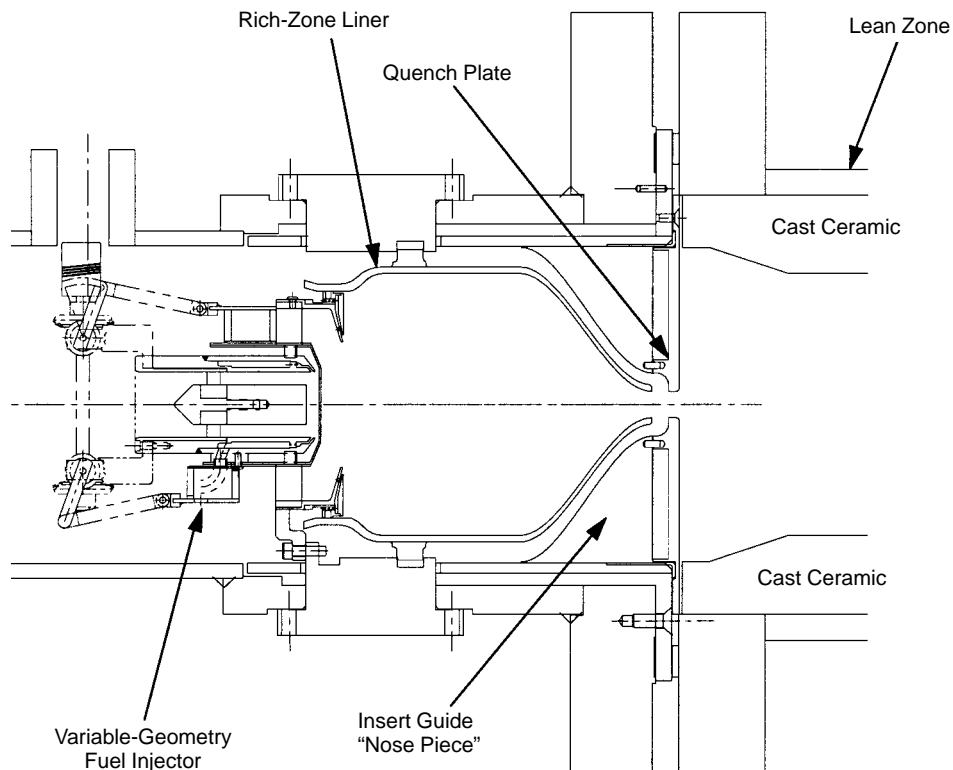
Integrated Module Rig Layout with RSQ Convoluted Liner/Quench Plate Combustor Configuration
